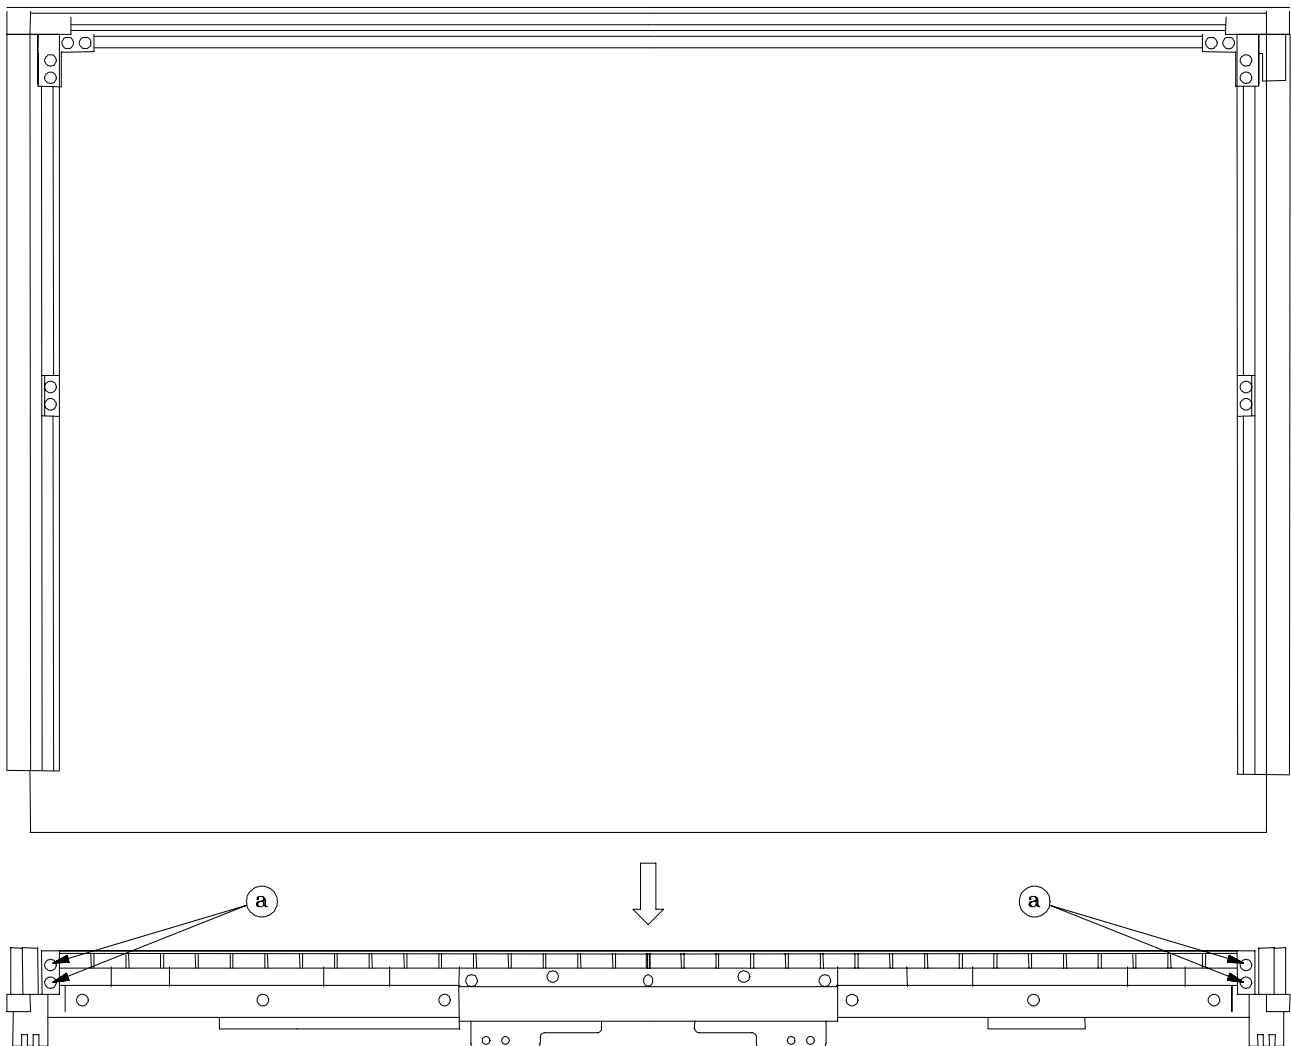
SCREEN-FRAME-BOTTOM Removal (Rear View)
